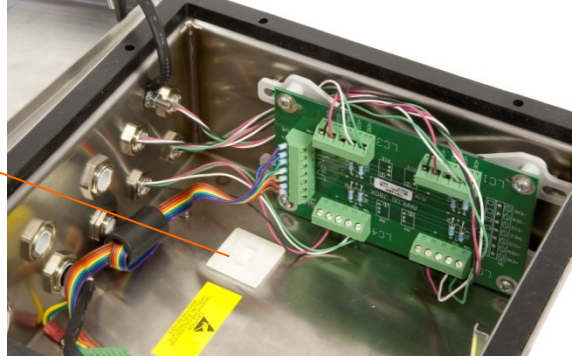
Load Cell Wires Installed and Routed, Summing Board Mounted
